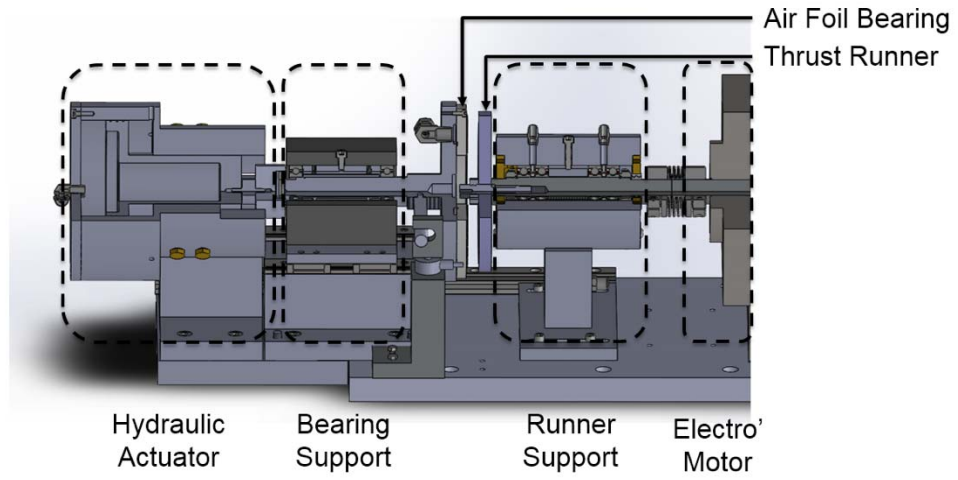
Solidmodel Design of the Thrust Air Foil Test Rig
